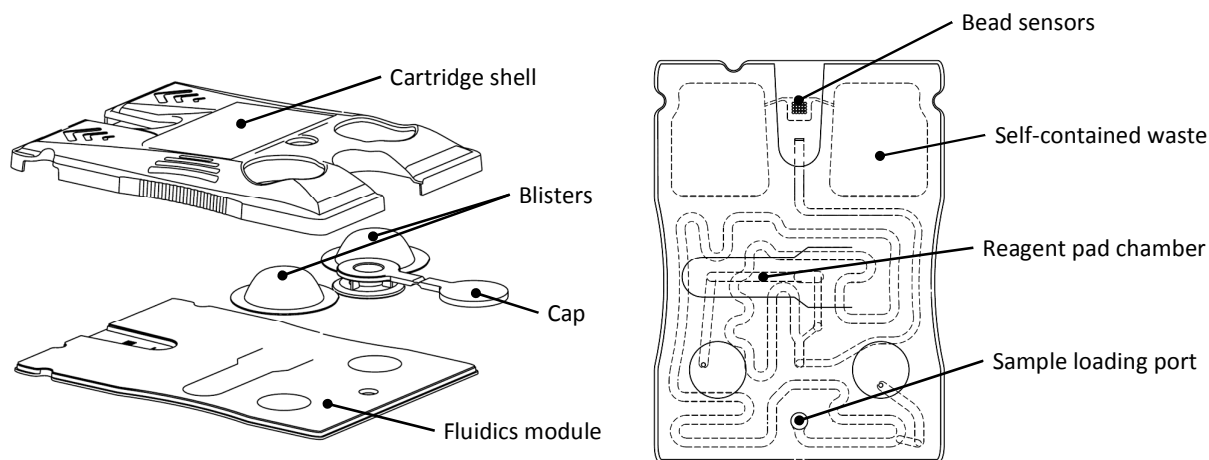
Drawings of the p-BNC disposable cartridge in an exploded view (left) and assembled top view (right).
